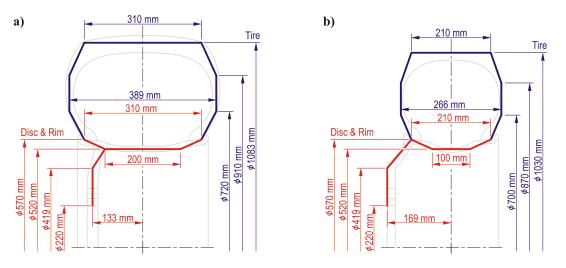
Dimensions of the cross-section of the crane wheel FE model: a) front wheel, b) rear wheel
